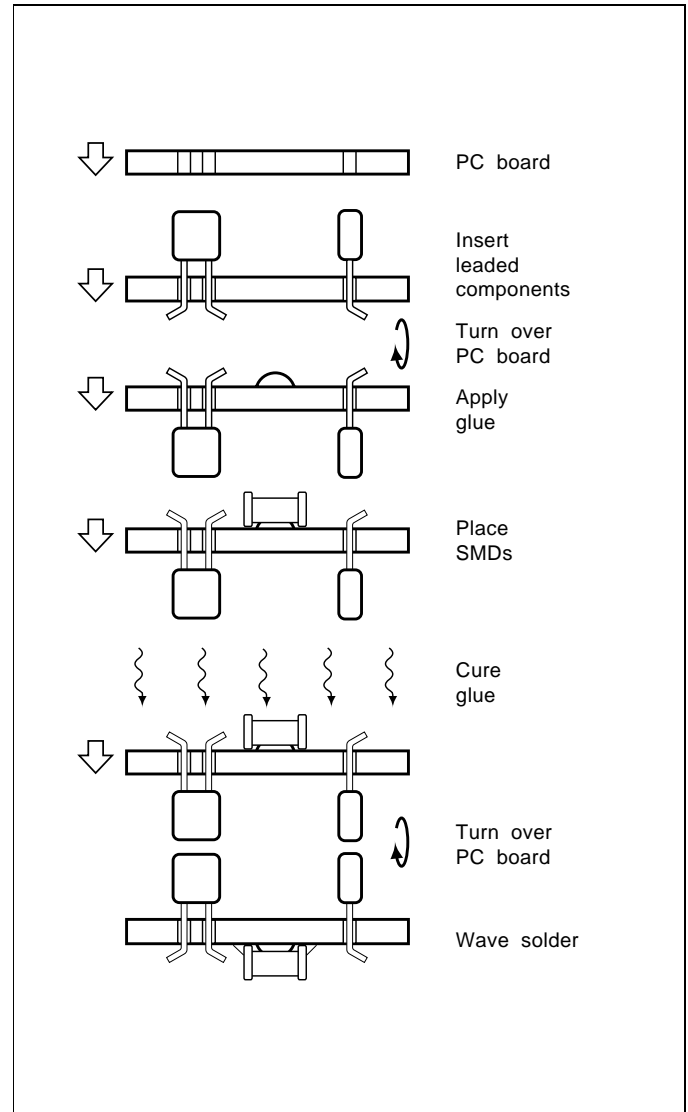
Wave Soldering PCBs With Both Surface Mount and Leaded Components
